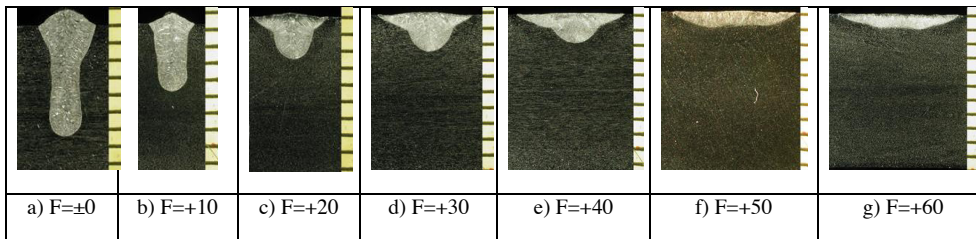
Cross sections of bead on plate melt runs in austenitic stainless steel, autogenously welded with Nd:YAG laser and different focal positions. Laser power: 3 kW and welding speed: 0.4 m/min.
